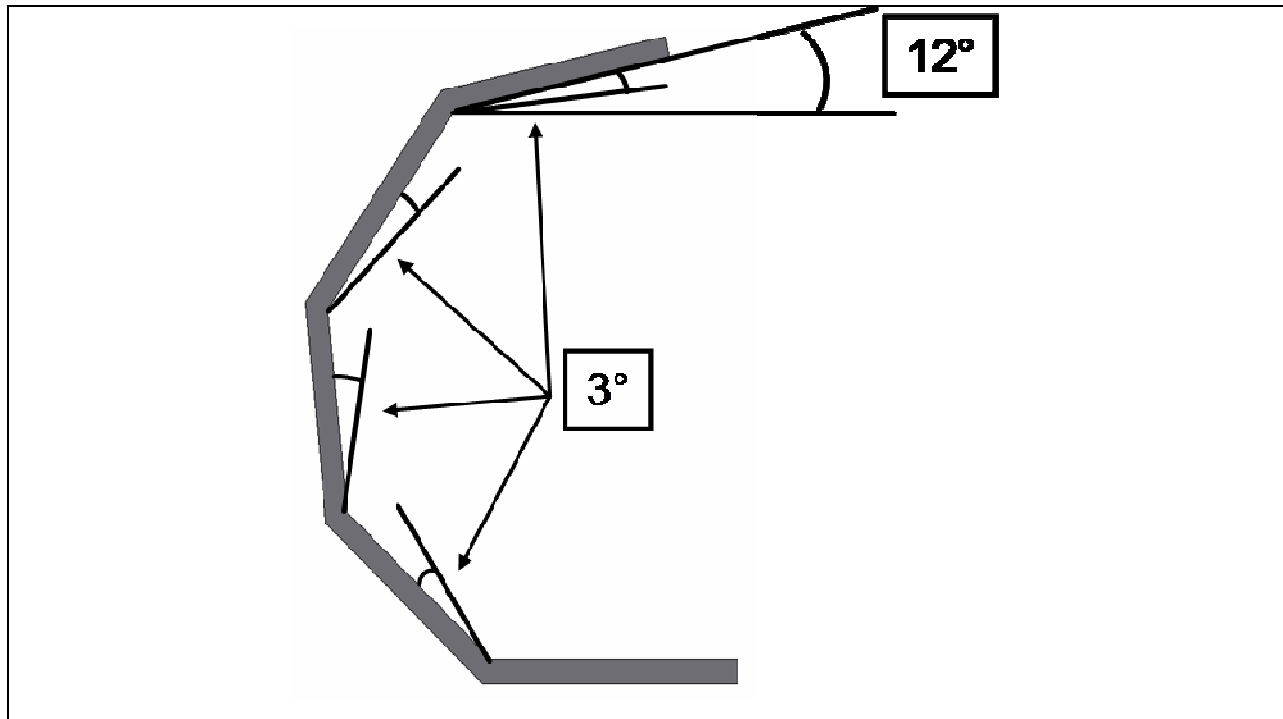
Stack-up of Errors in Bending Angles for Inner Shaft
